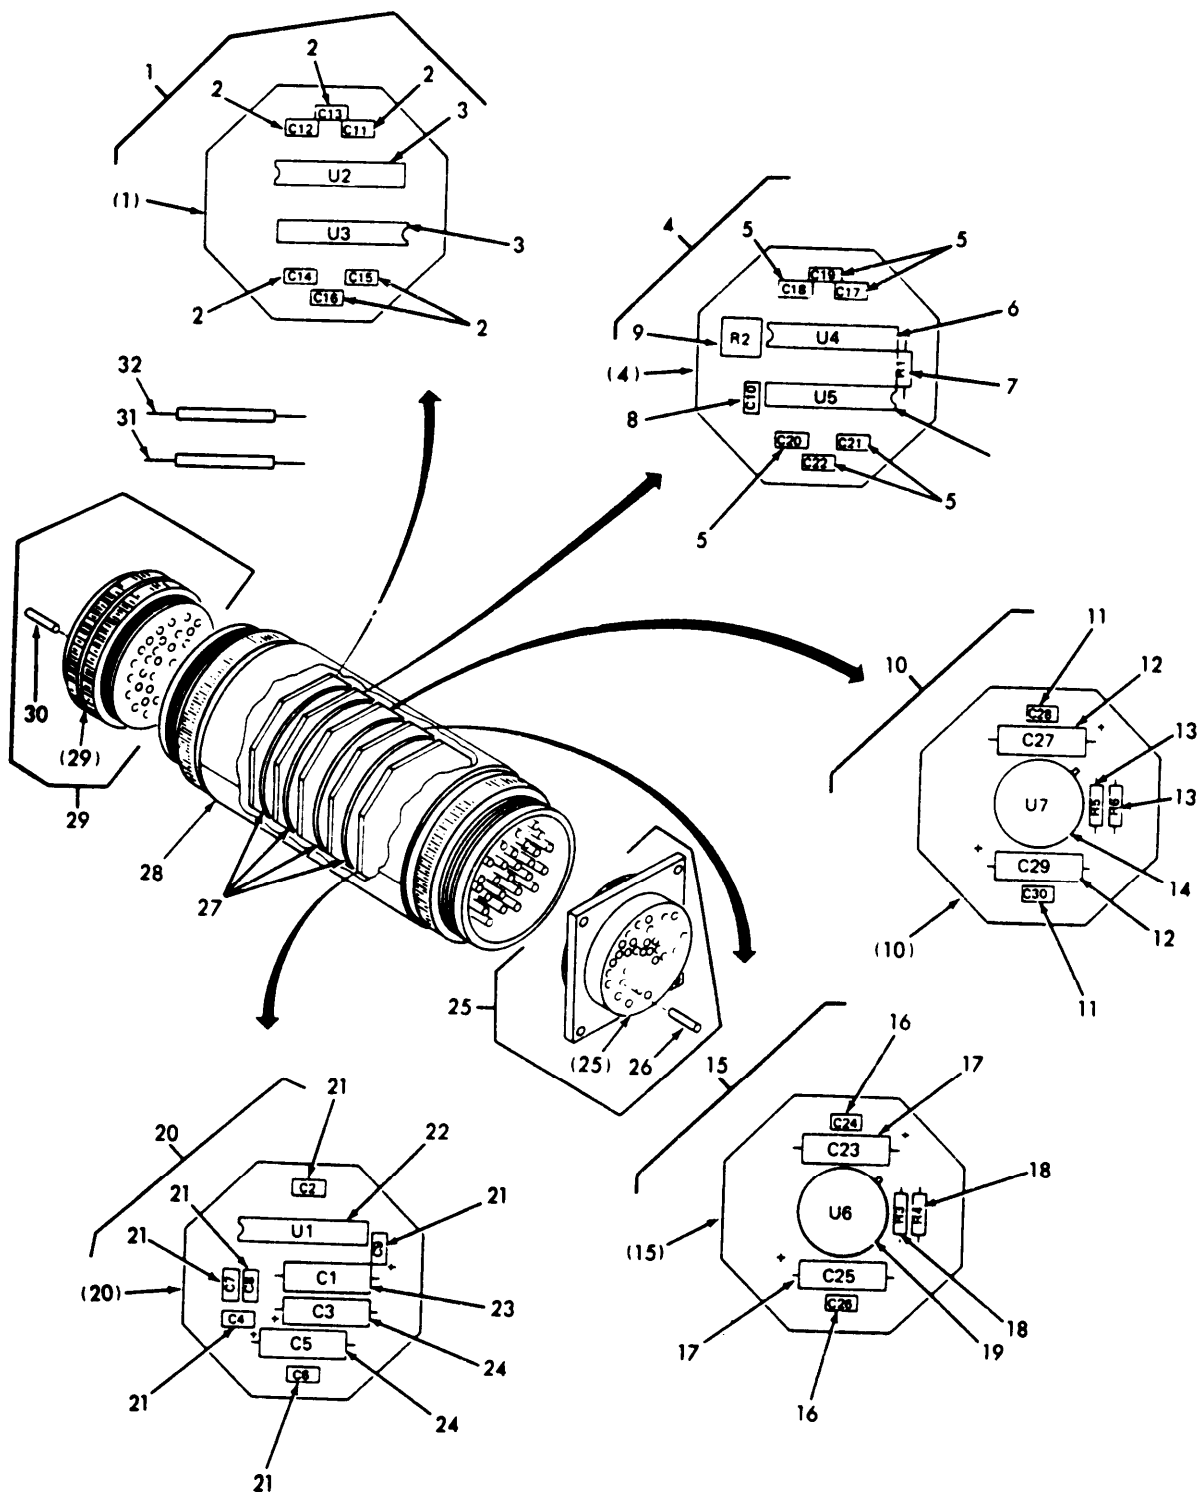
VIDEO MULTIPLEXER ASSEMBLY COMPONENT PARTS
